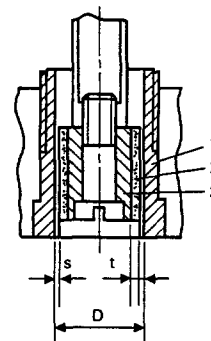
Piston and cylinder of a pump for liquid hydrogen: 1 = cylinder; 2 = external piston surface, made of a material with minimum drag; 3 = piston; S = clearance; D = cylinder diameter; t = size of material with minimum drag.
